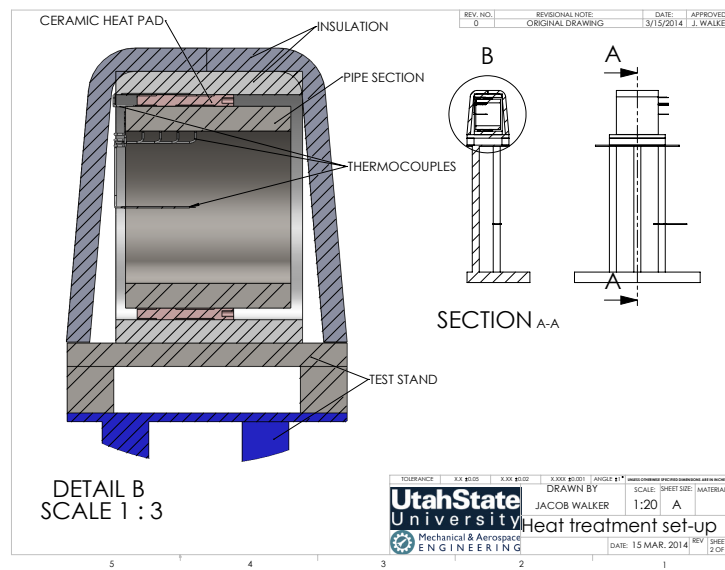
Drawings of Heat-Treatment Set-Up; Page 2
